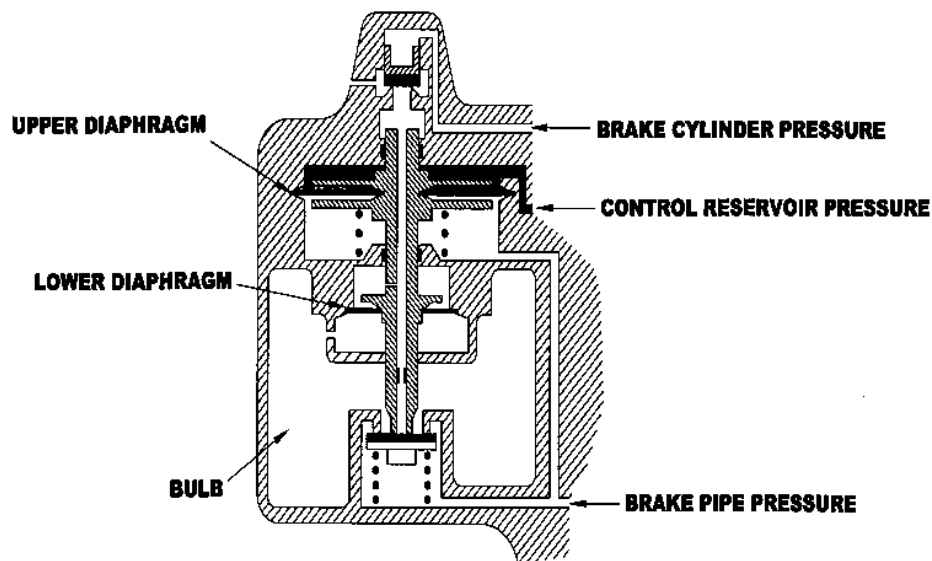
SECTIONAL VIEW OF QUICK SERVICE VALVE
